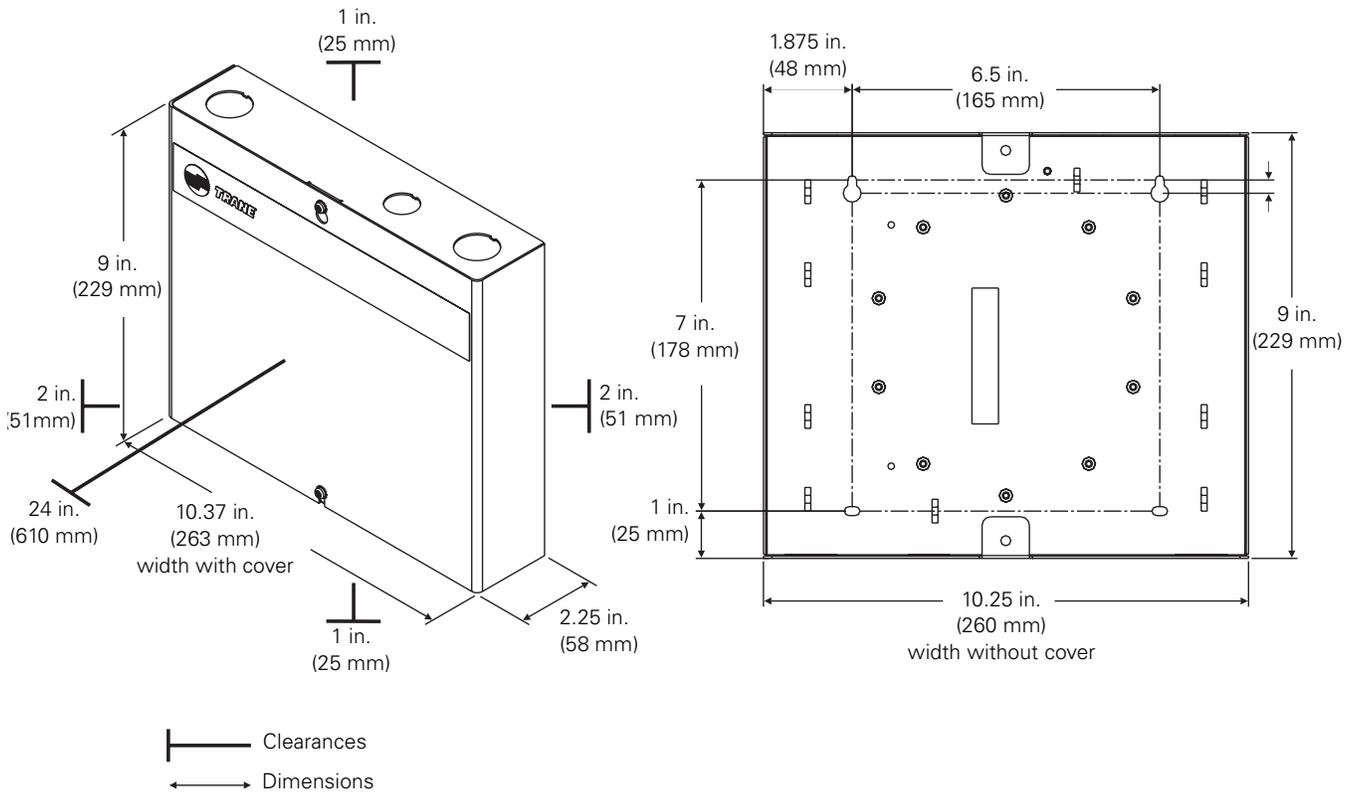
Dimensions and clearances for the metal-enclosure version I/O module
